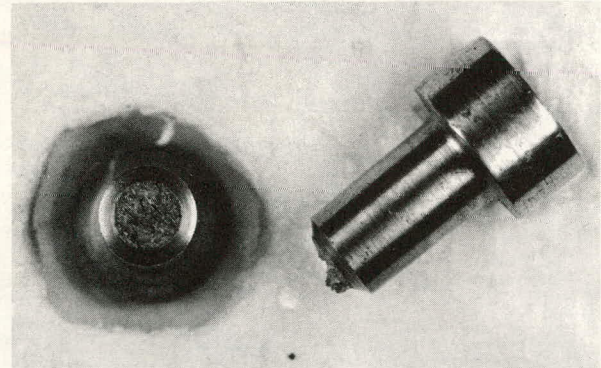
Fracture Surface of Notched 212-B Specimen
